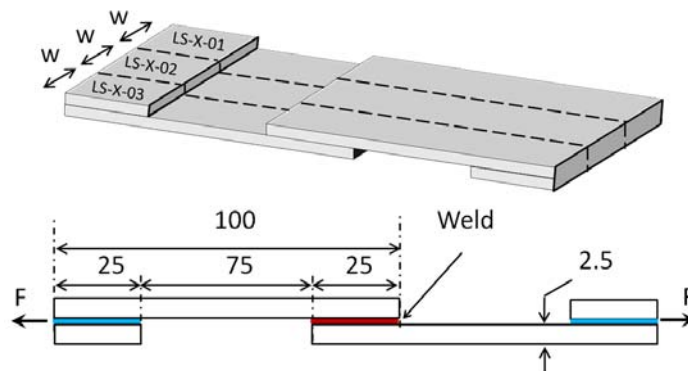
Dimensions of the used single lap shear specimen (in mm)
